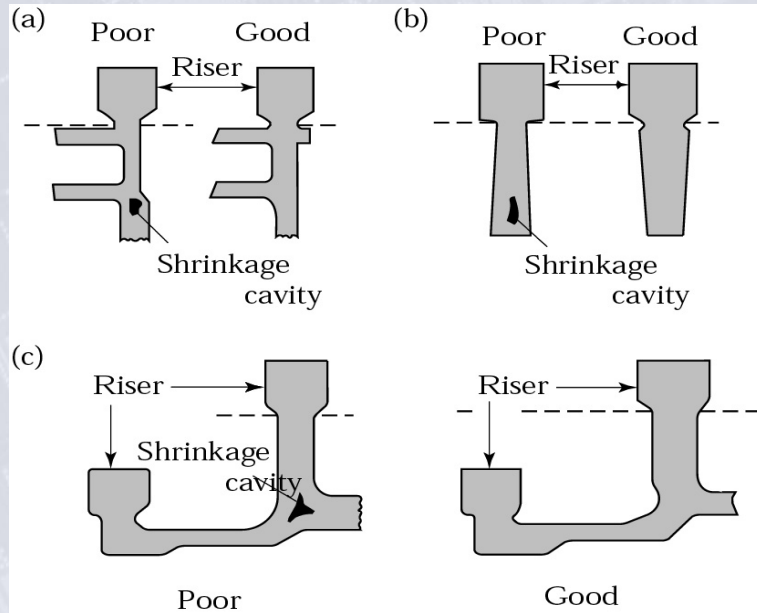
Examples of design modifications to avoid shrinkage cavities in castings.
